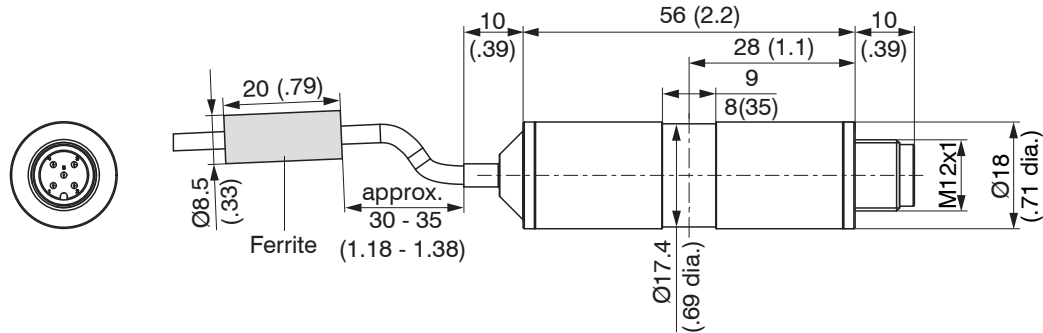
Dimensional drawing of DTD controller, dimensions in mm (inches)
